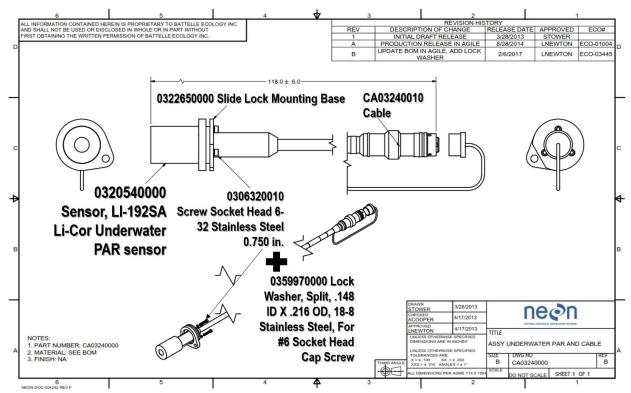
CA03240000 Assy Underwater PAR and Cable Drawing
